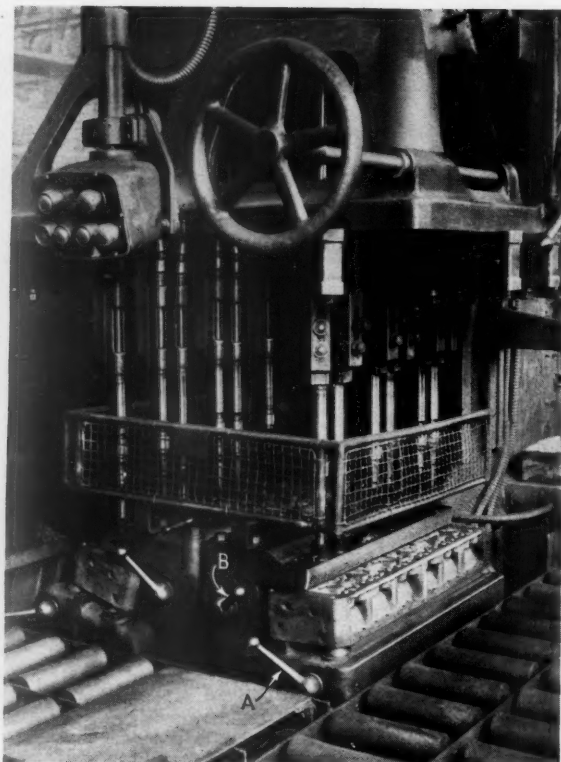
Set-up for reaming the inlet and exhaust valve guide holes.
